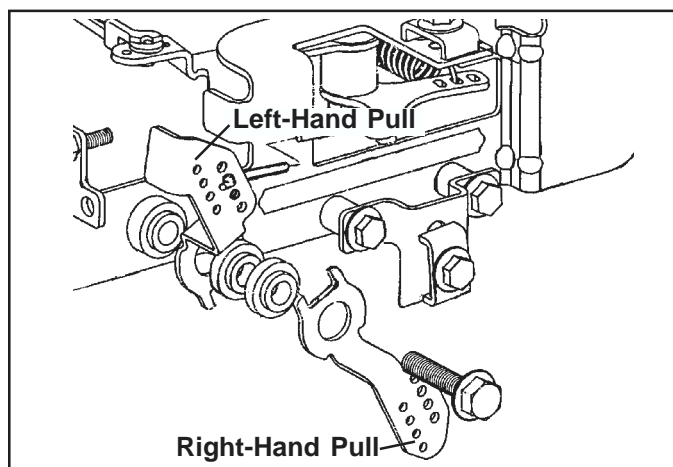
Assembled Lever, Left or Right-Hand Pull.
